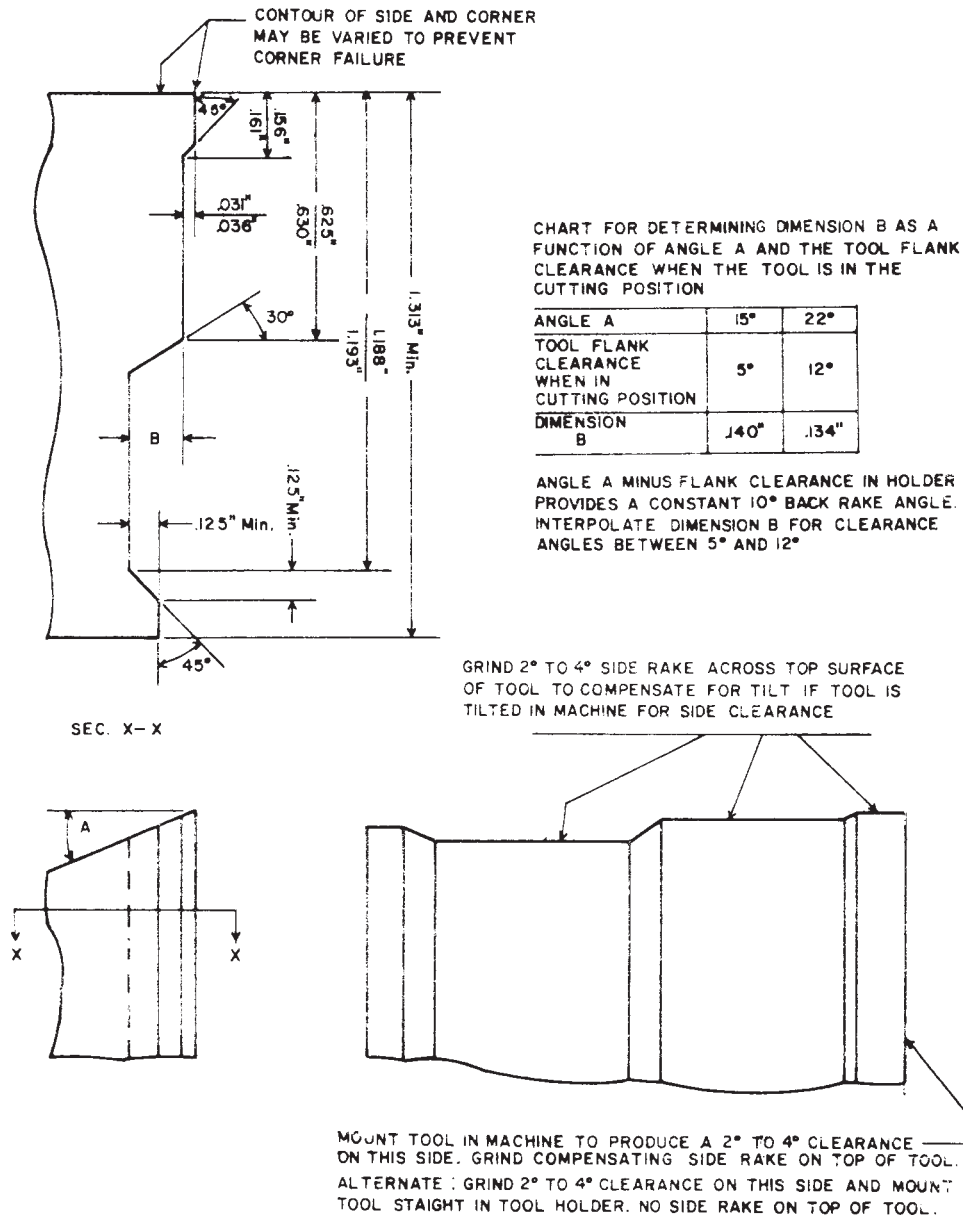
Details of the Tool Edge for the ASTM Rough-Form Tool
